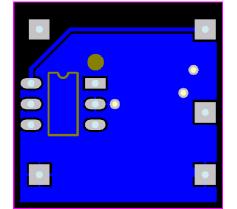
Bottom, PCB Layout for TDFN4 1.2 mm x 1.6 mm (board size: 1 inch x 1 inch)
